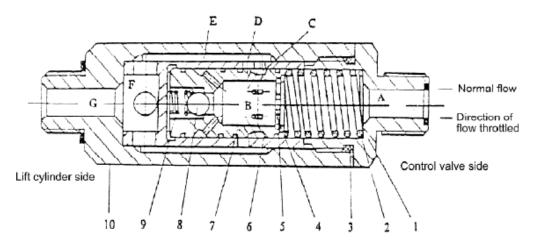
Flow regulator valve (1) Nipple (2) Spring (3) Ring seal (4) Snap ring (5) Spool (6) Sleeve (7) Steel ball (8) Spring of the check valve (9) Valve body 5.1.6 Tilt cylinder
